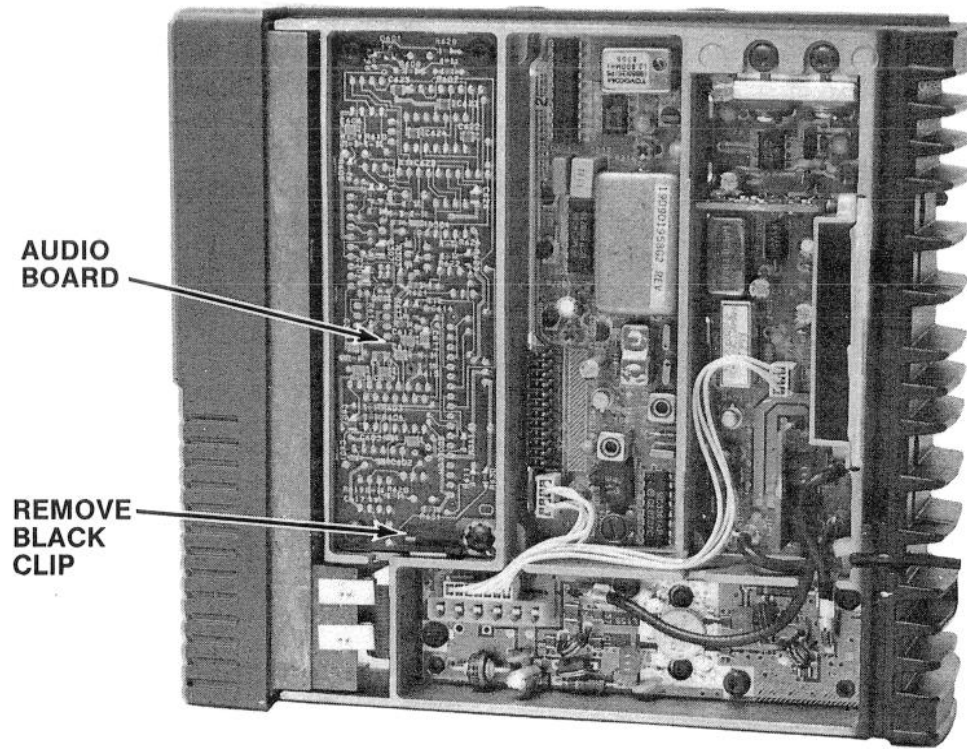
BOTTOM VIEW (COVER REMOVED)
